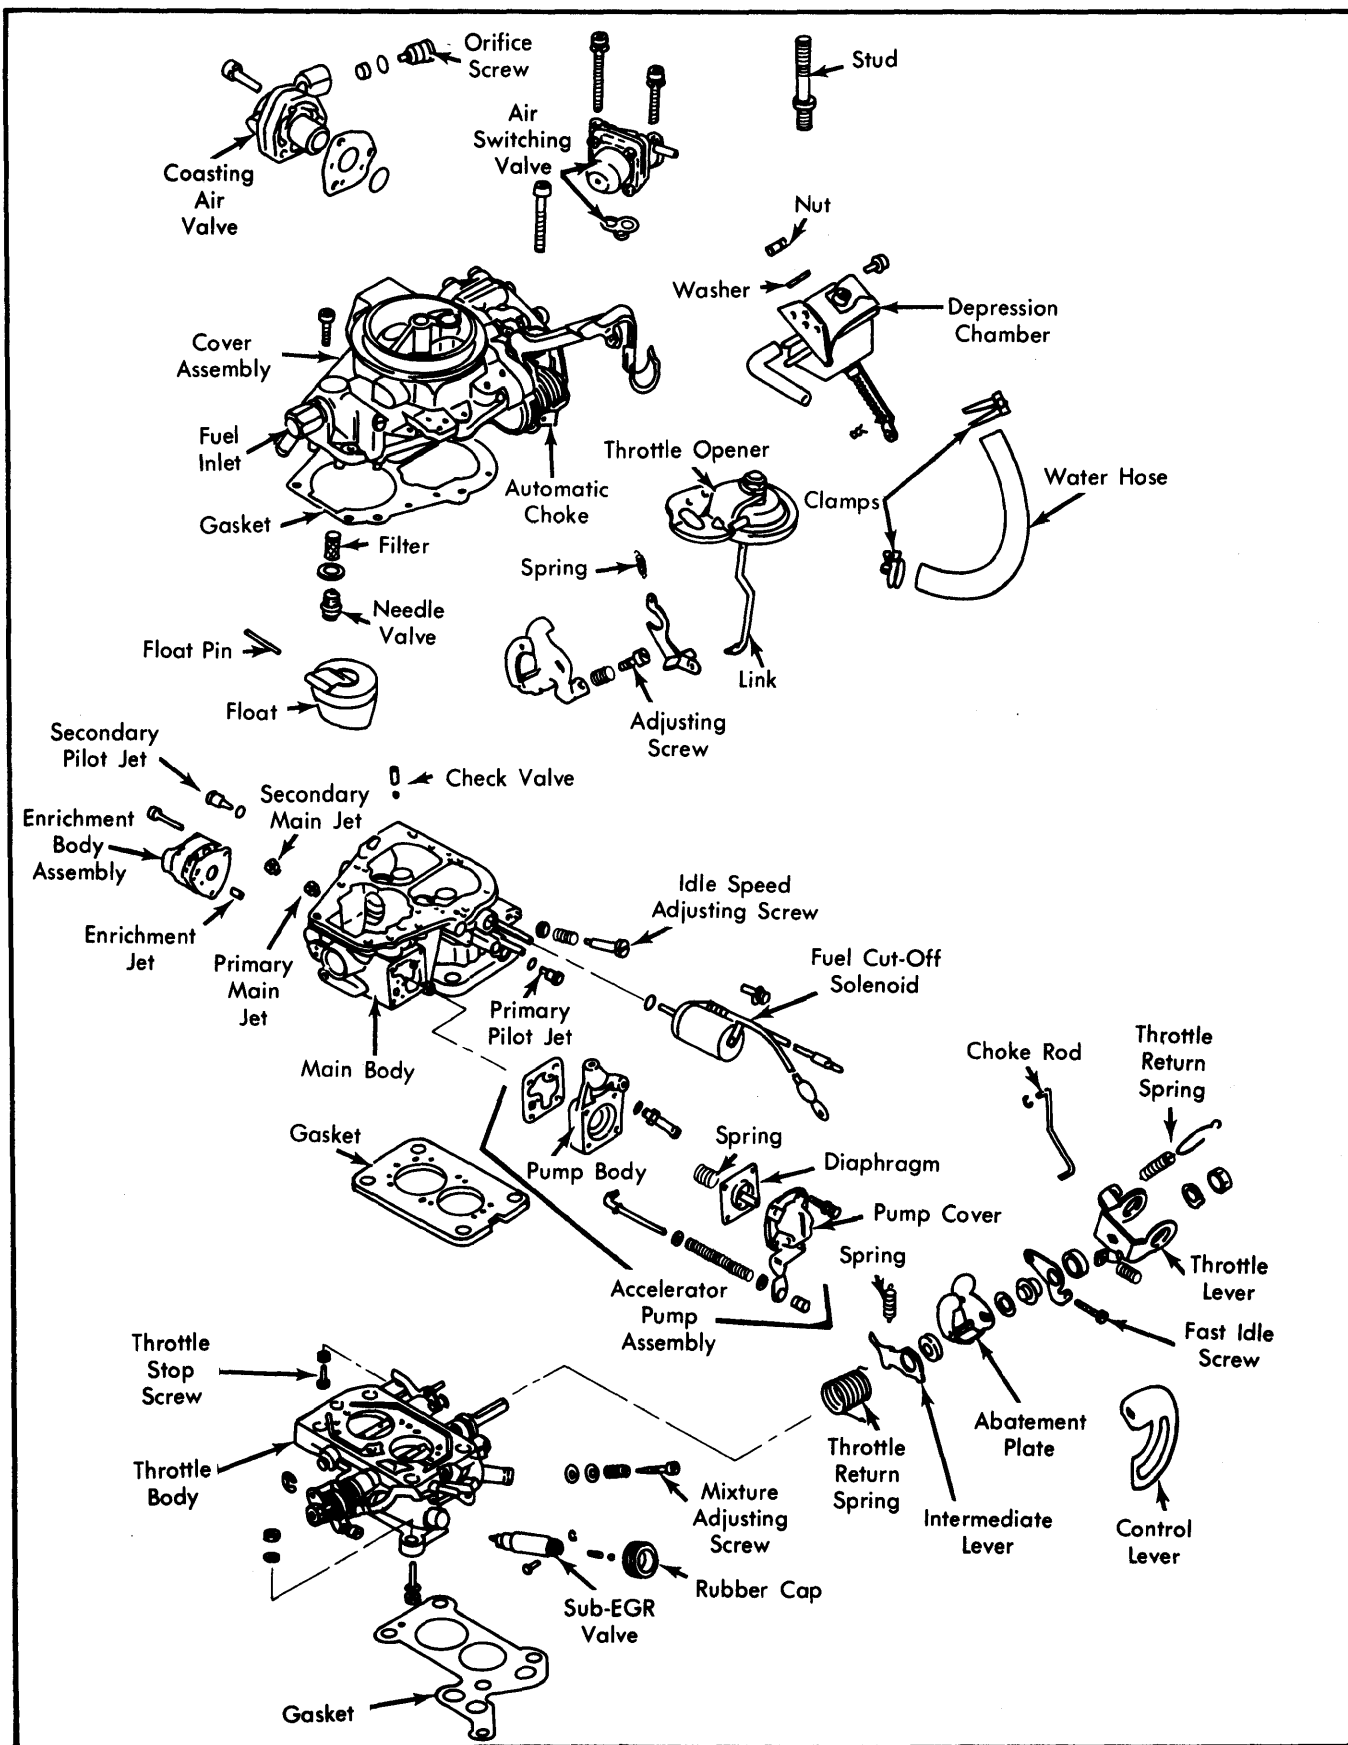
Exploded View of Solex (Mikuni) DIDTA 2-Barrel Carburetor
